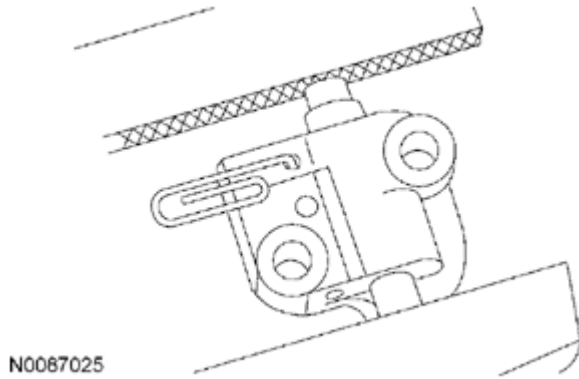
Retaining Tensioner Piston With 1.5 mm (0.06 in) Diameter Wire Or Paper Clip
